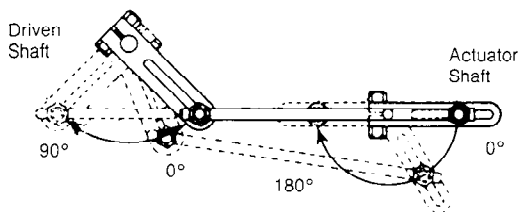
Linkage for 180° Actuator Shaft Rotation for 90° Damper
